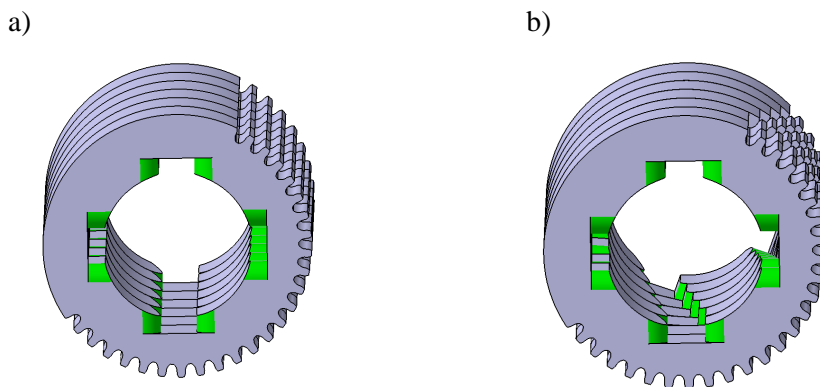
Concept model No 5. Assembly view: a) axonometric view, b) axonometric view showing the geometry of the outer surface of the rotational segments and the way of adjusting the segments
